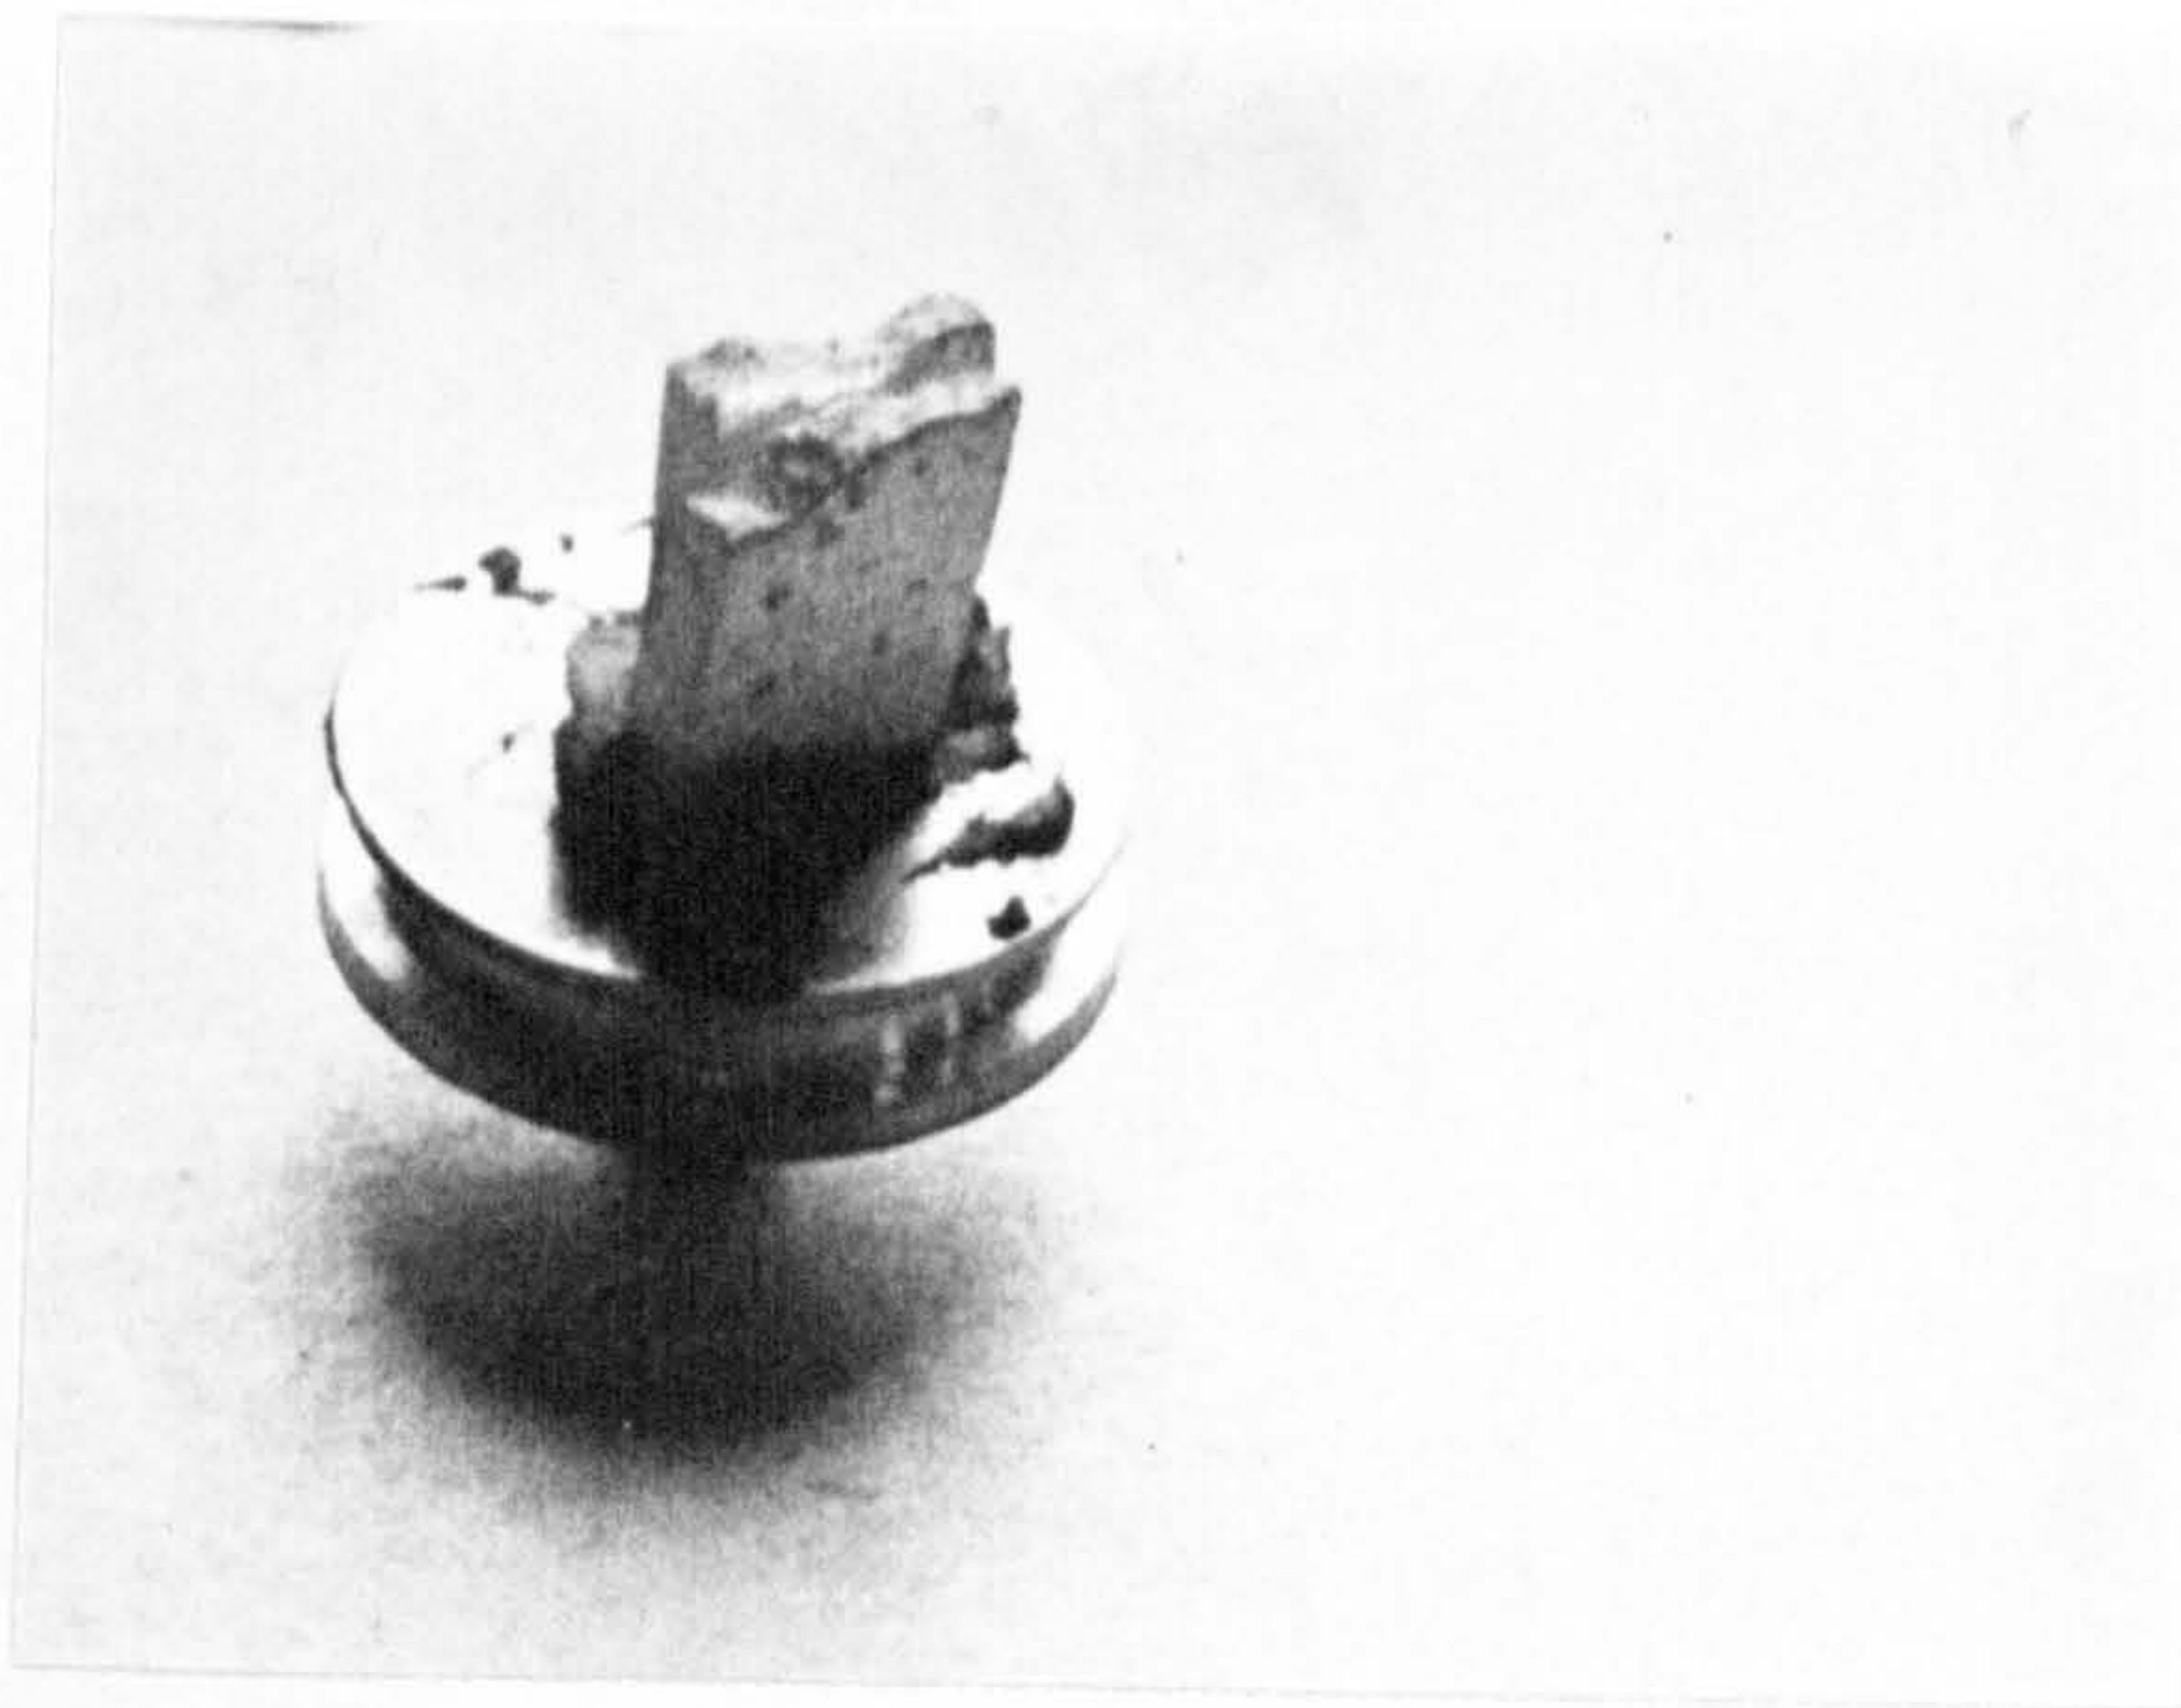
(c) Fracture surface of SPF cavitated Supral 150; note jagged appearance where shear fracture direction is changed by cavitation.
